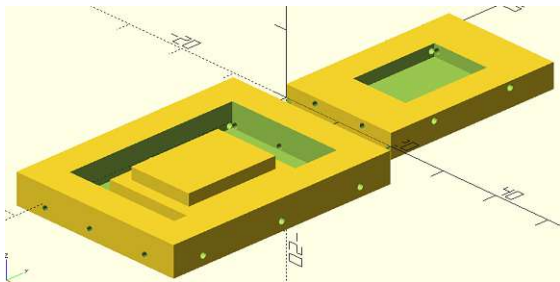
Left the inverse resin casting form and right the PVS casting form. Scales are in mm.
